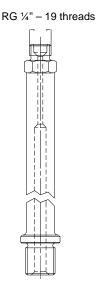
Special tool - Kohler Ref.: 19.75.014
